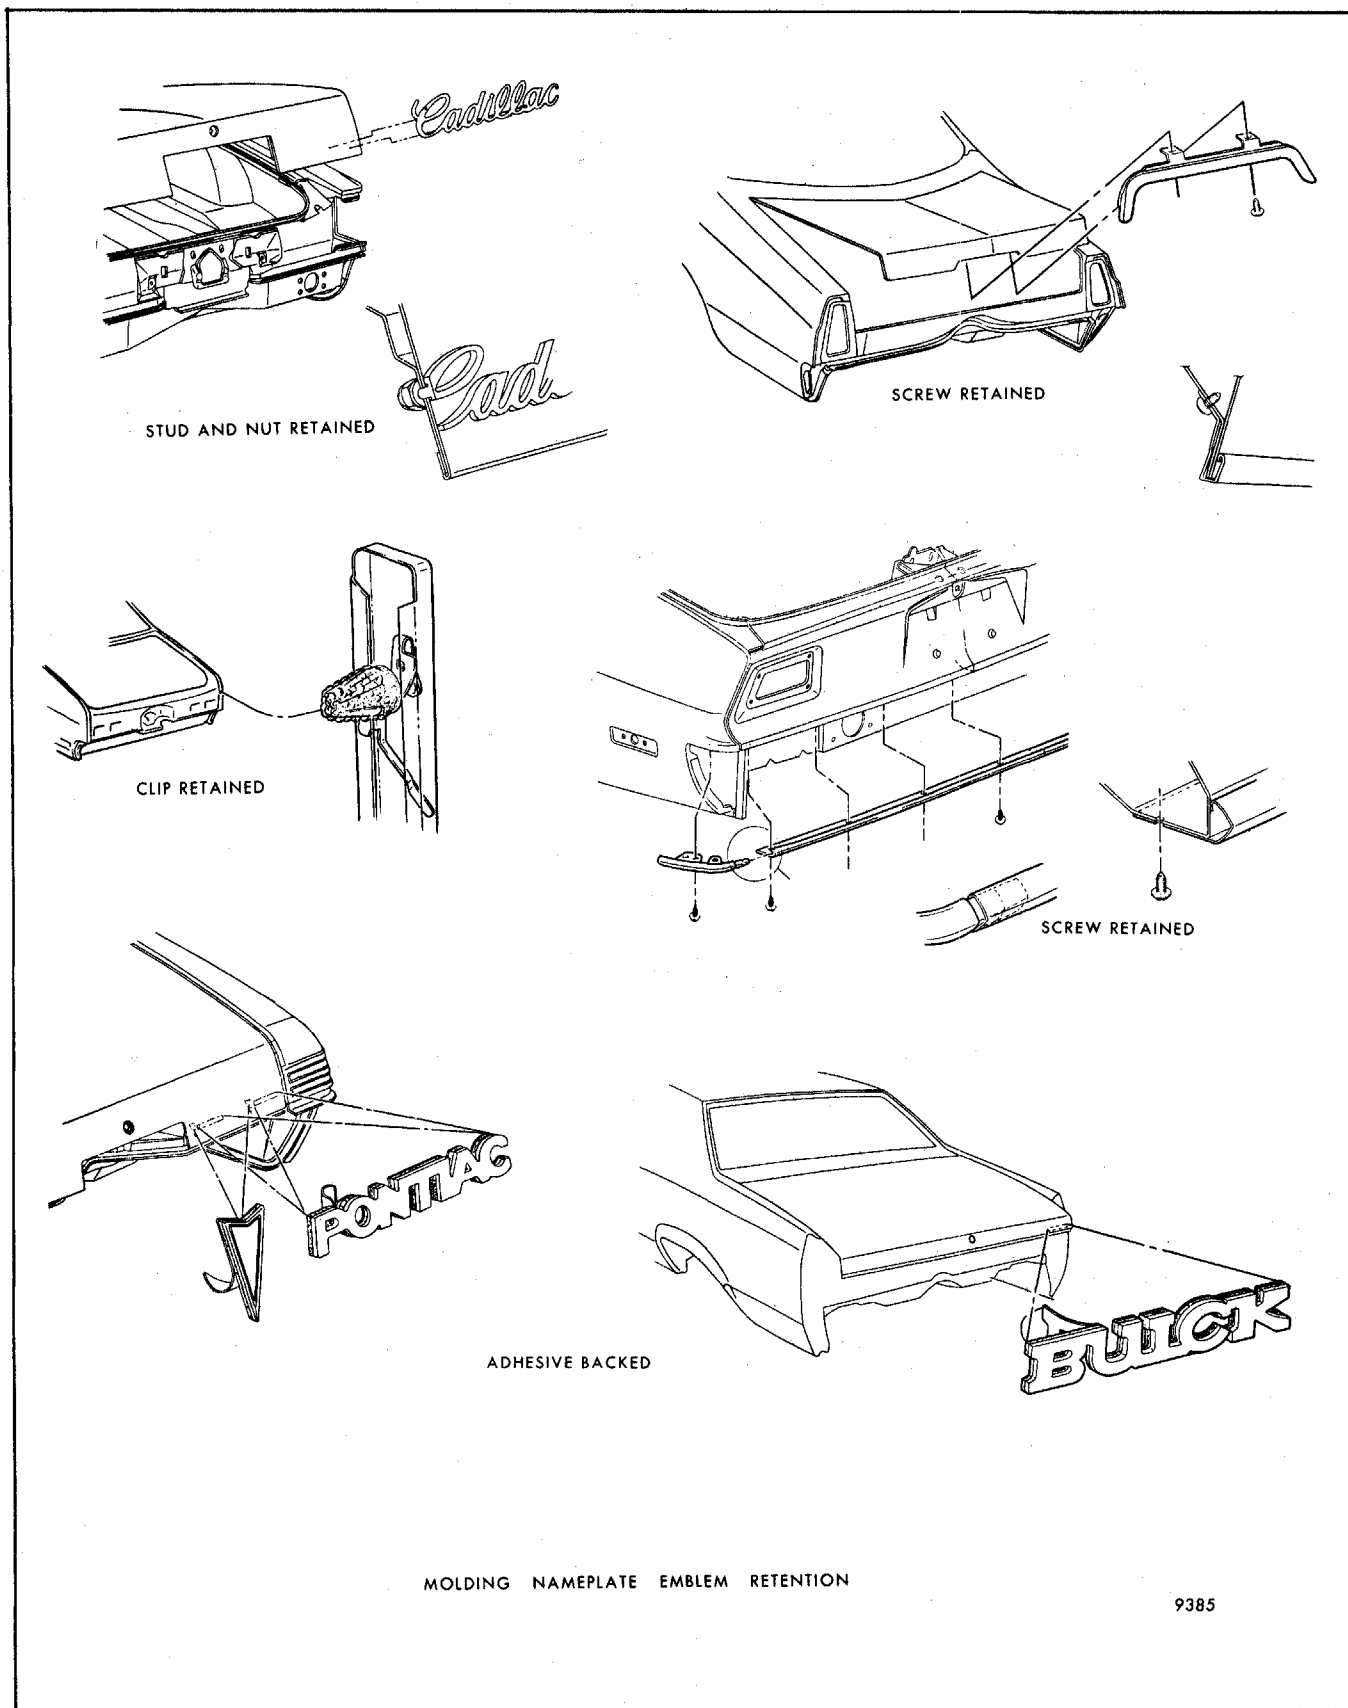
Molding - Name Plate-Emblem Retention
